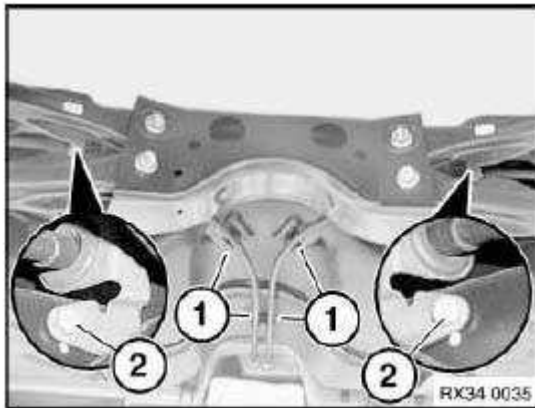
Rear Axle Carrier, Parking Brake Bowden Cable Holders And Retaining Bolts
